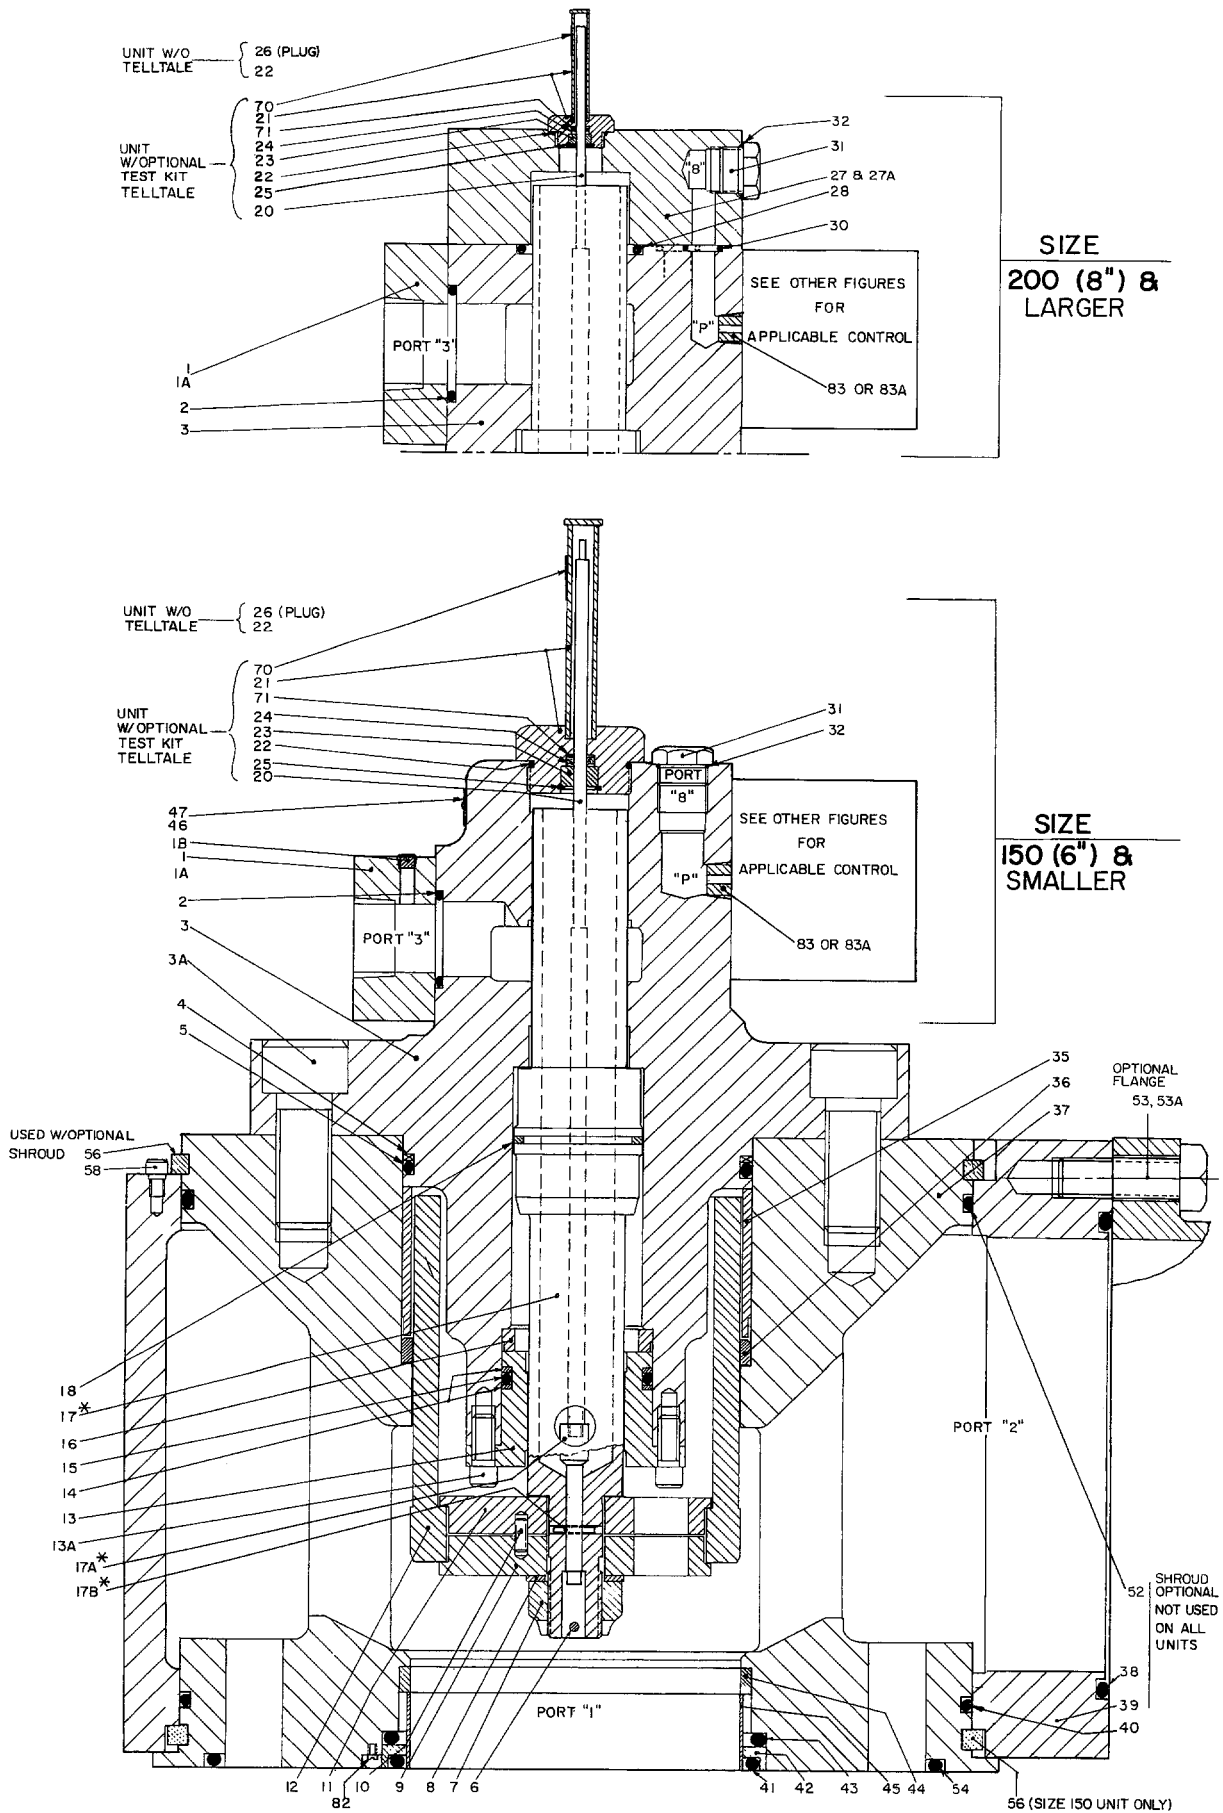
Parts Drawing, Type "VSA" 3-way Prefill valves (508280C sht. 1).
